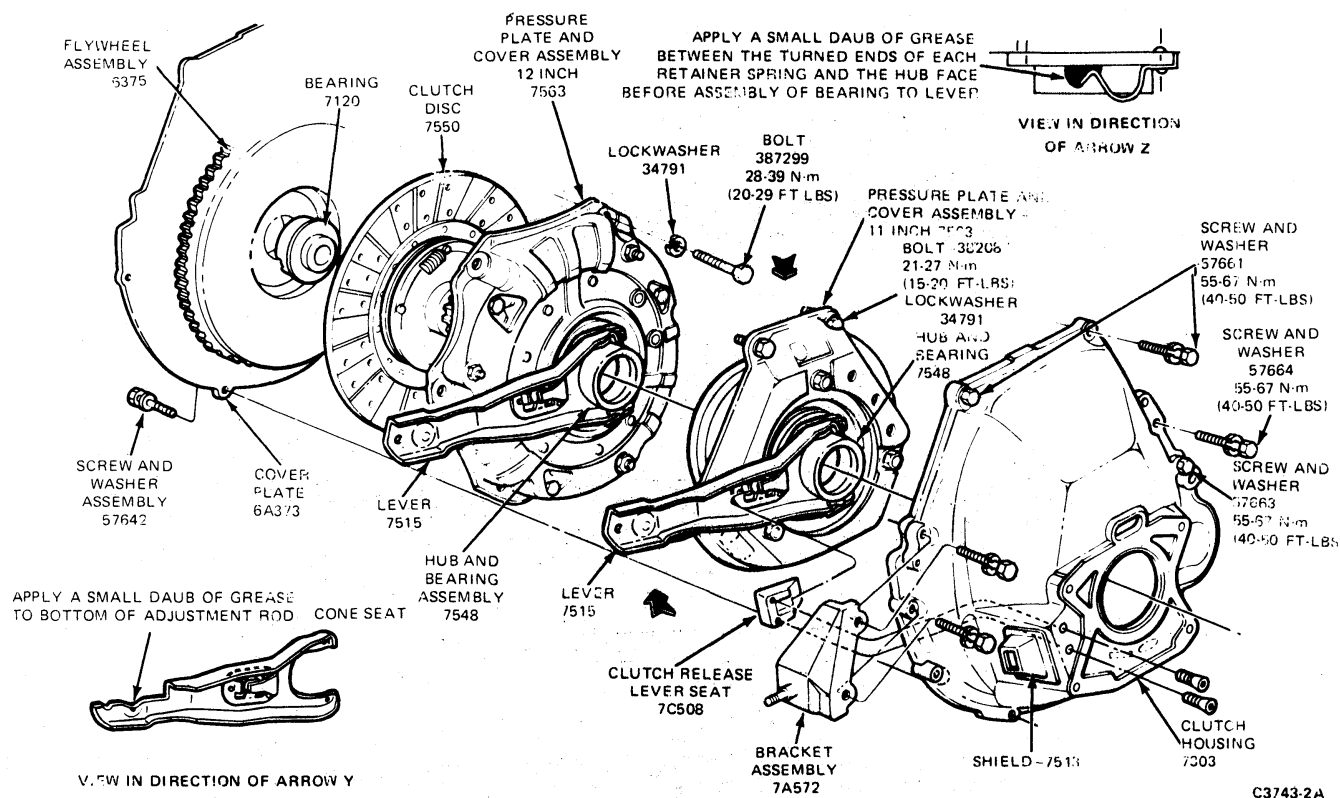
Clutch Installation—F-100—350, Bronco with 5.8L (351 CID) and 6.6L (400 CID) Engine
